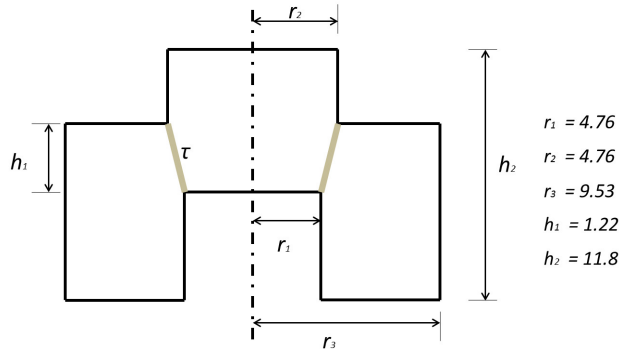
Schematic view of the hat specimen showing the key dimensions.
